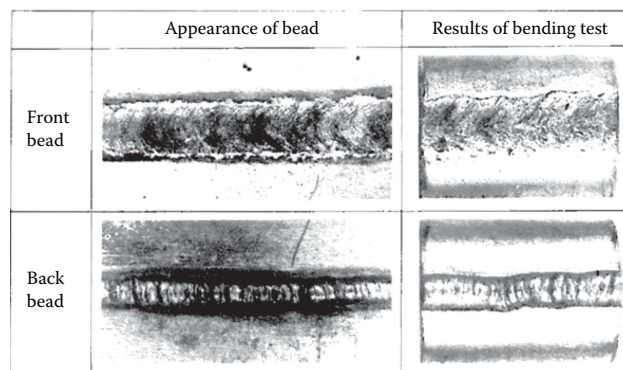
Results of one-side welding of A5052P ($t = 3\text{ mm}$) by MIG short arc welding
